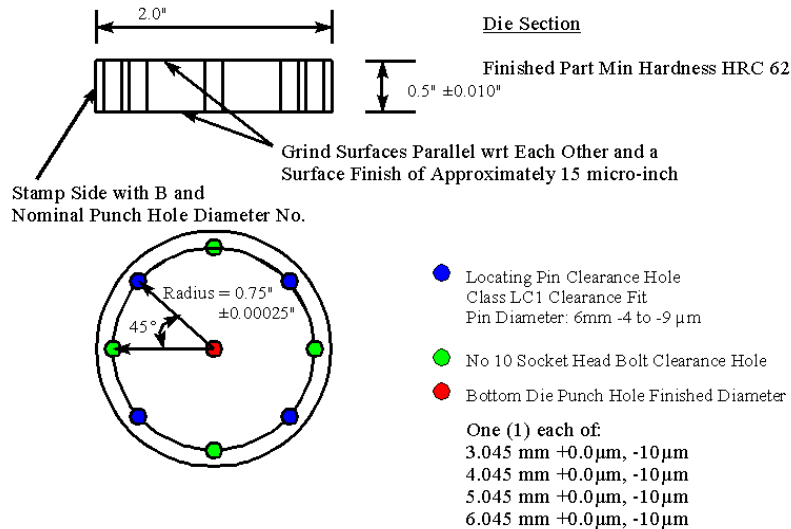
Schematic showing the general dimensional design requirements of the dies fabricated for the shear punch test fixture.
